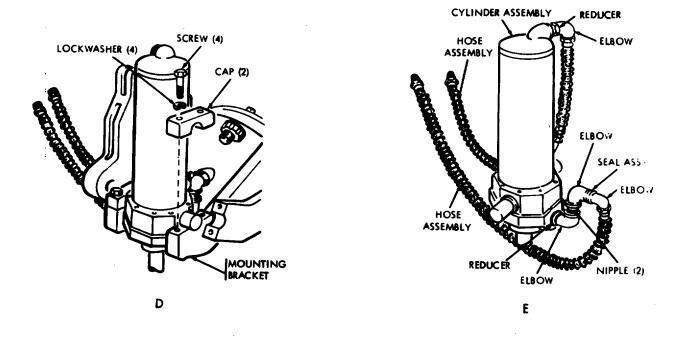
Removal or installation of cylinder assembly and guards (sheet 1 of 2).
